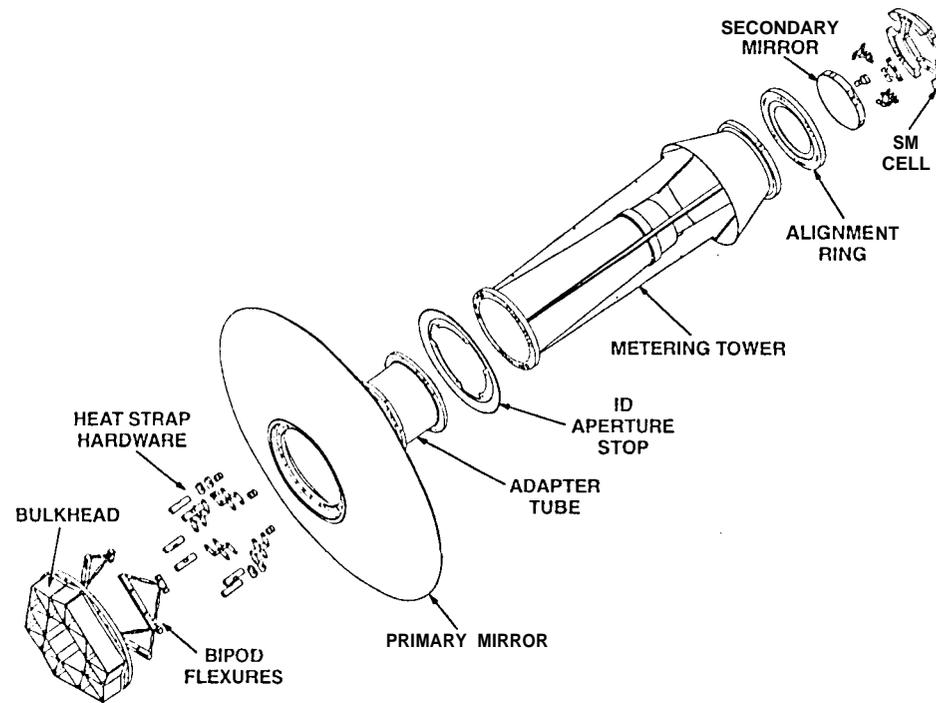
Exploded view of ITTT showing the simplicity of the design.
